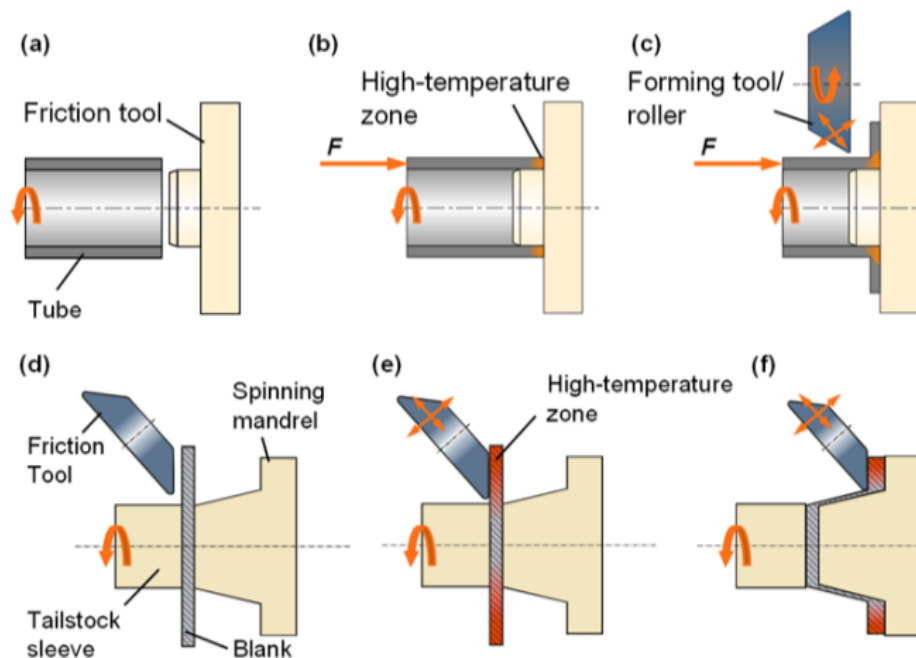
Schematics of the principle of friction spinning. (a) Rotation of a tube against a friction tool, (b) axial feeding of the friction tool against the tube end, (c) forming of the heated tube end using an additional roller. (d) Transfer of the friction-spinning principle to shear spinning, (e) generation of a localized high-temperature zone by the friction tool, (f) forming of the locally heated blank against the mandrel. Reproduced with permission from [72].
